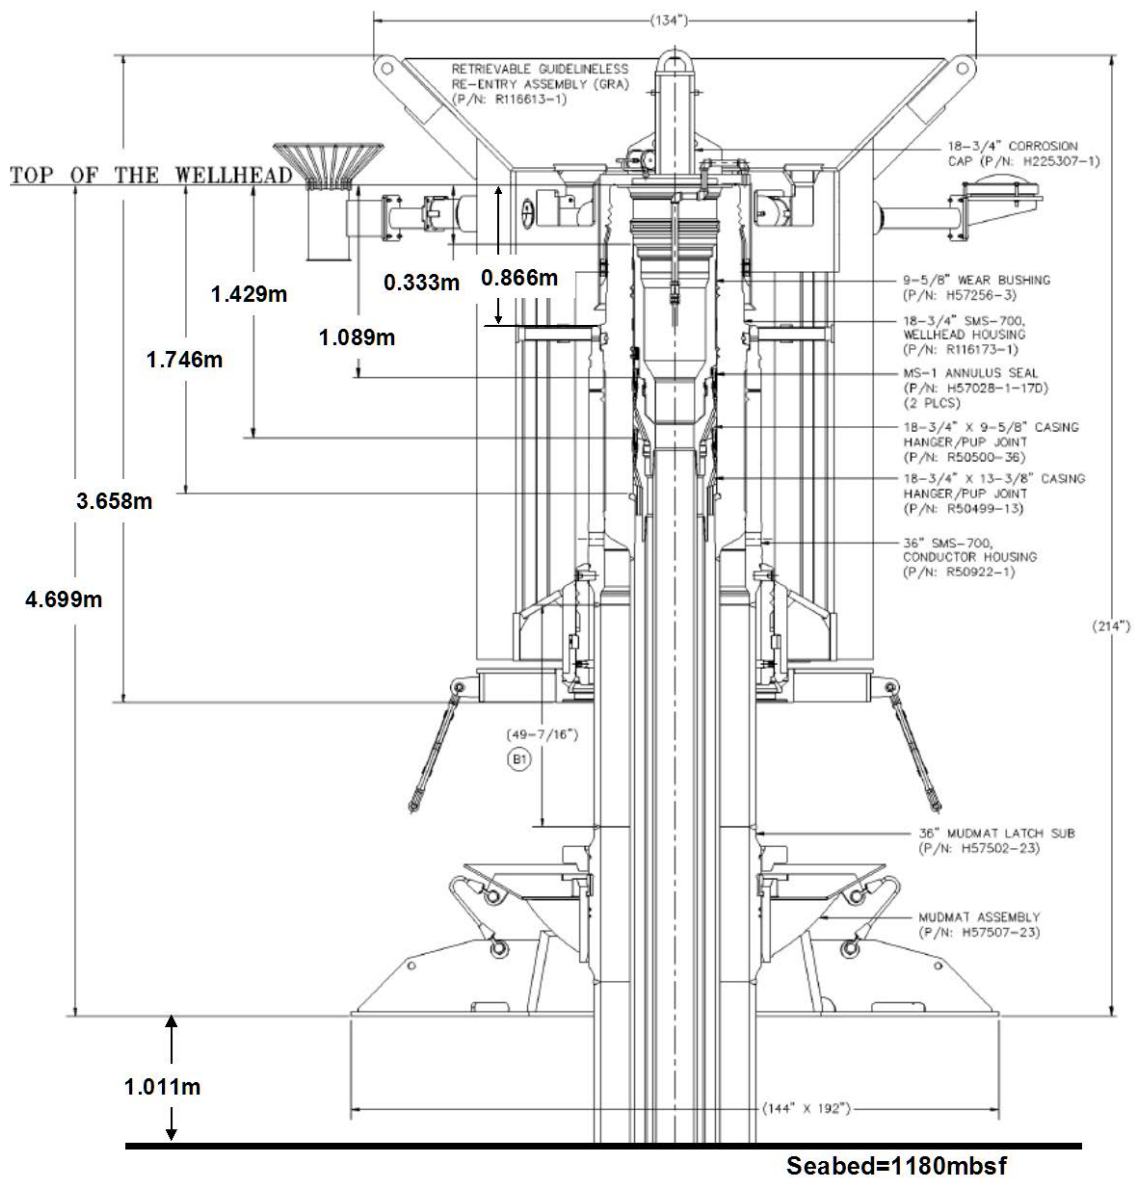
A drawing of the riser wellhead of Hole C9001D.
